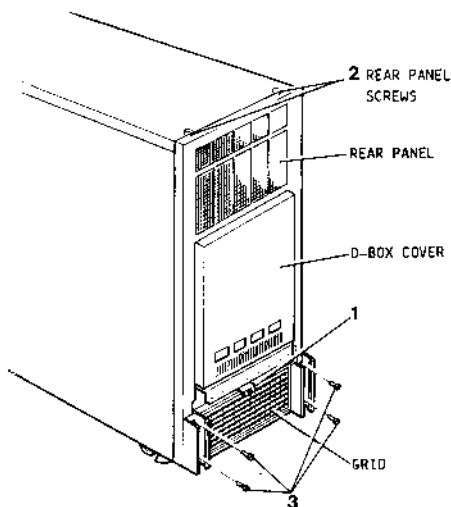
Removing Panels at Rear of SBO Cabinet
